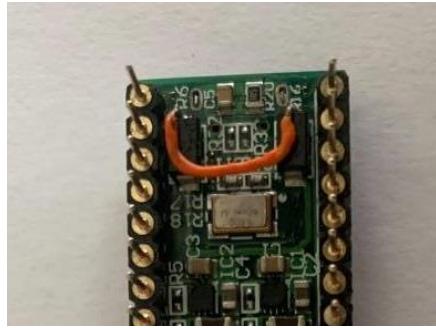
CMODS6 VU and USB5V0 Connection PCB photo [13]
